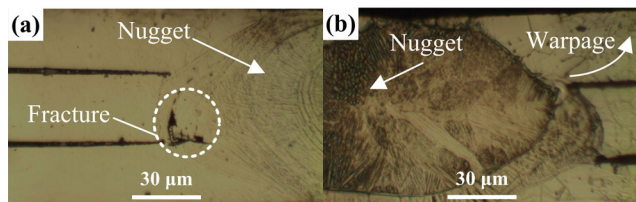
(a) Fracture of stainless steel foils caused by spark splashes. (b) Warpage deformation of the stainless steel foils due to excessive welding pressure.
